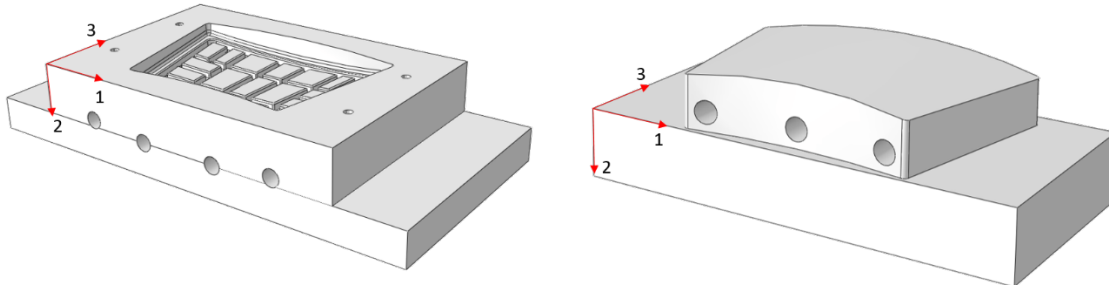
Location of cartridge heaters in the additive manufactured tools.
